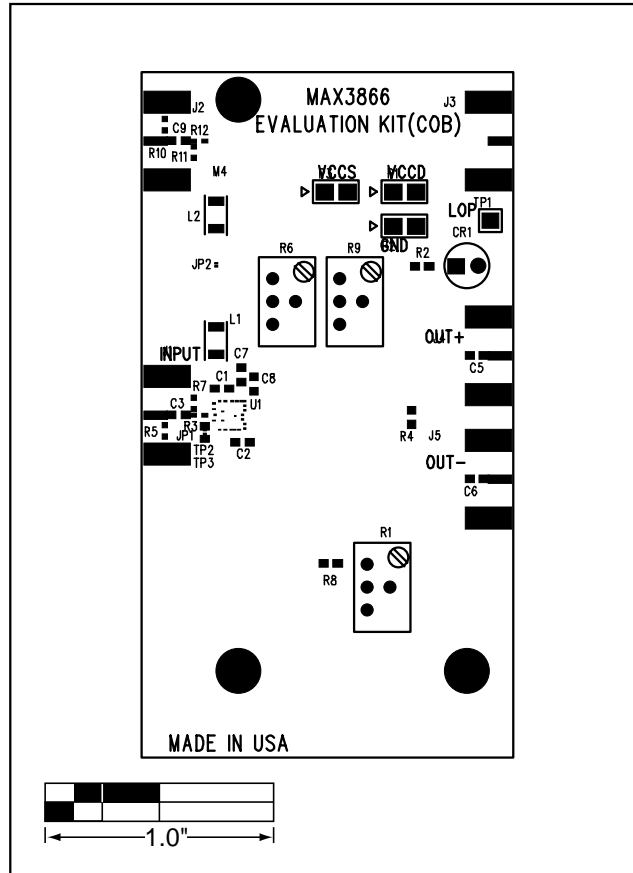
MAX3866 EV Kit Component Placement Guide—Component Side
